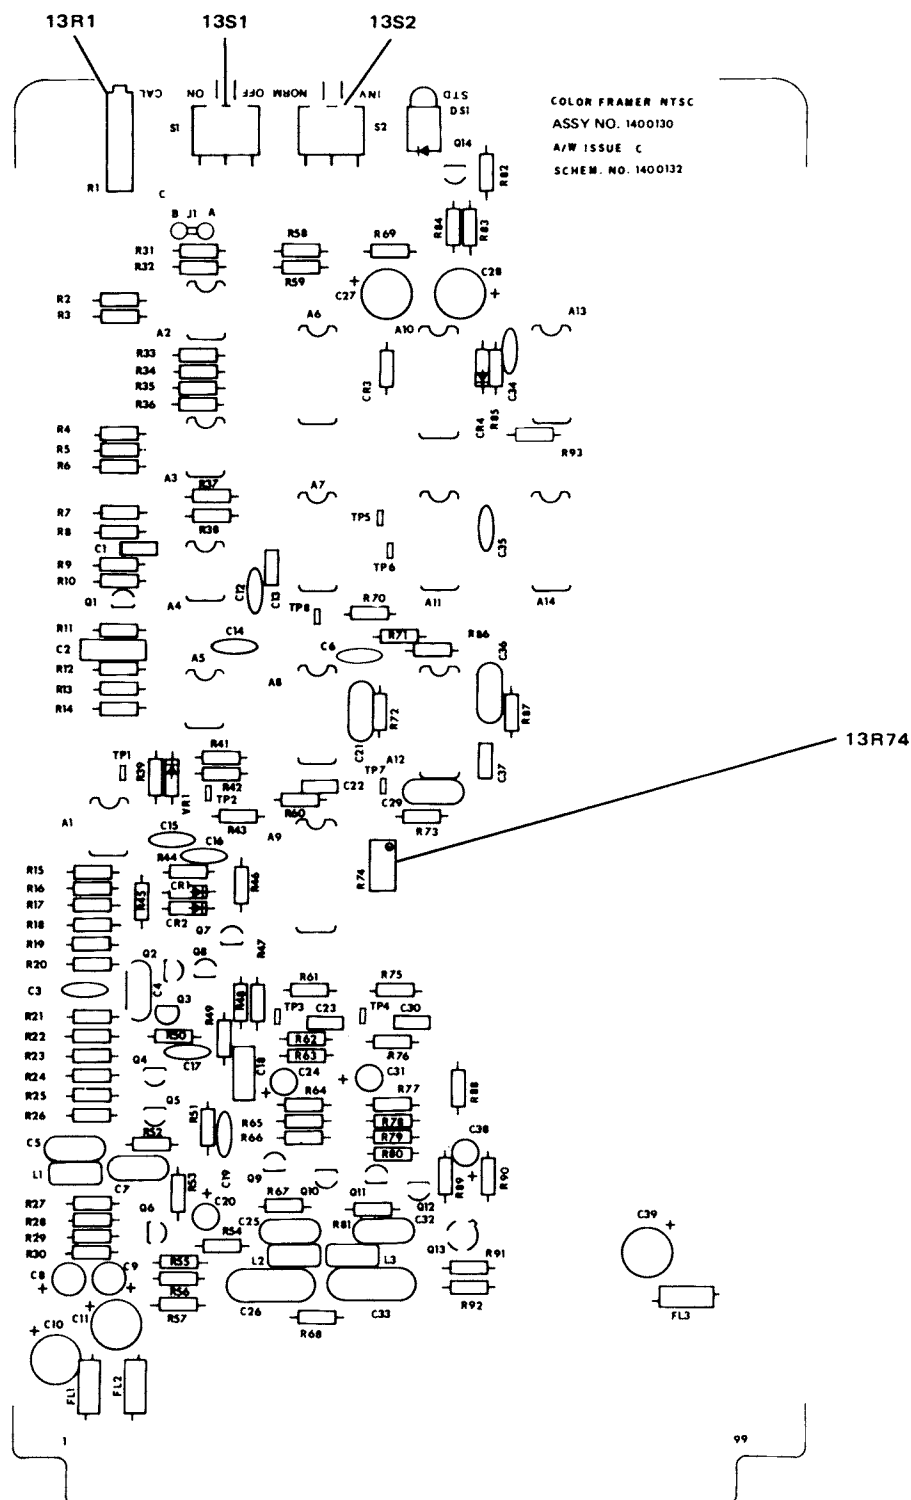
NTSC 525 Color Framer PWA 13, Assembly No. 1400130
